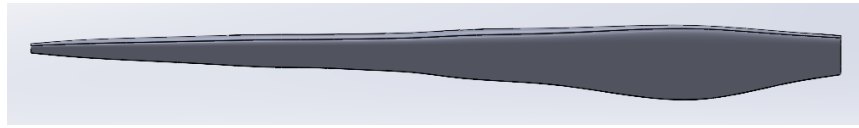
Modified T-Motor – dimensional static SVM – front view
